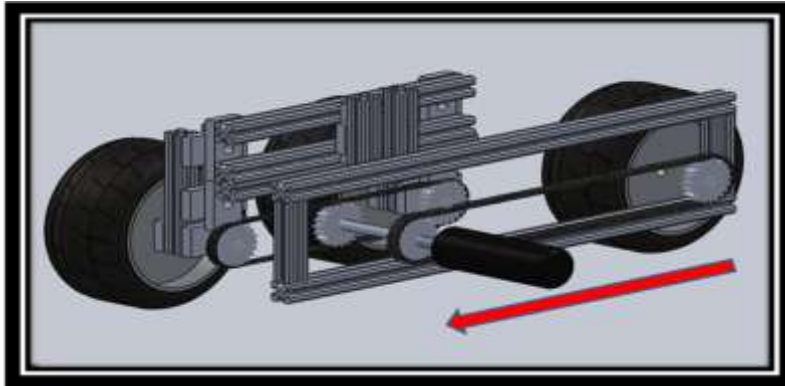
Robot pulley system used to move one side of symmetrical movement of all wheels by central wheel moved by electrical motor and measured by encoder.
